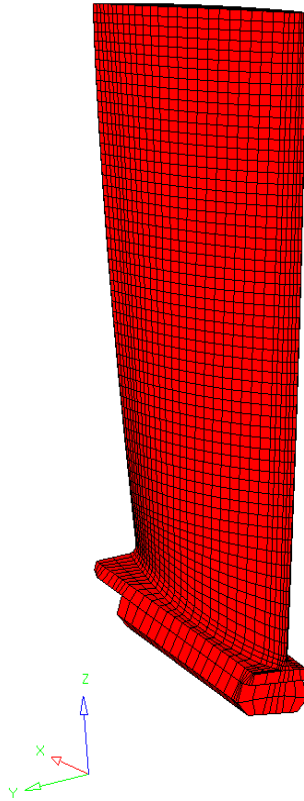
First stage of SO-3 engine compressor rotor blade
